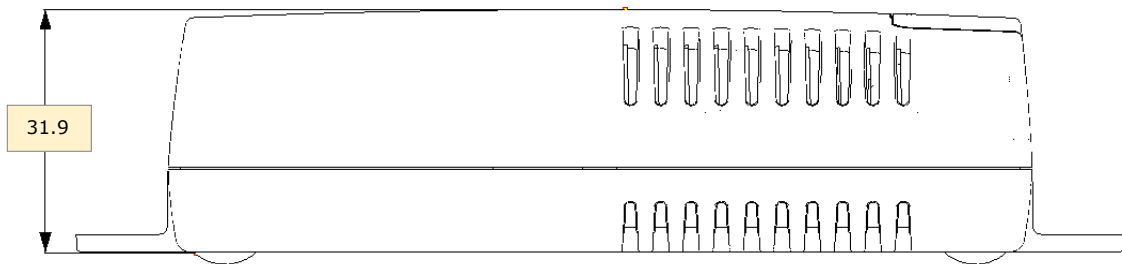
LDSBus 2CH NL Relay Dimension - Side View
